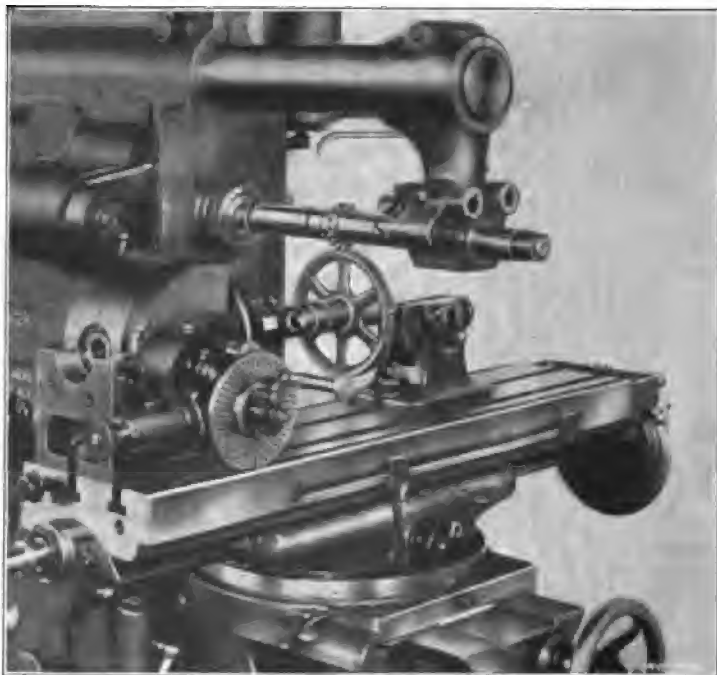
Cutting the Teeth of a Spur Gear in a Universal Milling Machine
